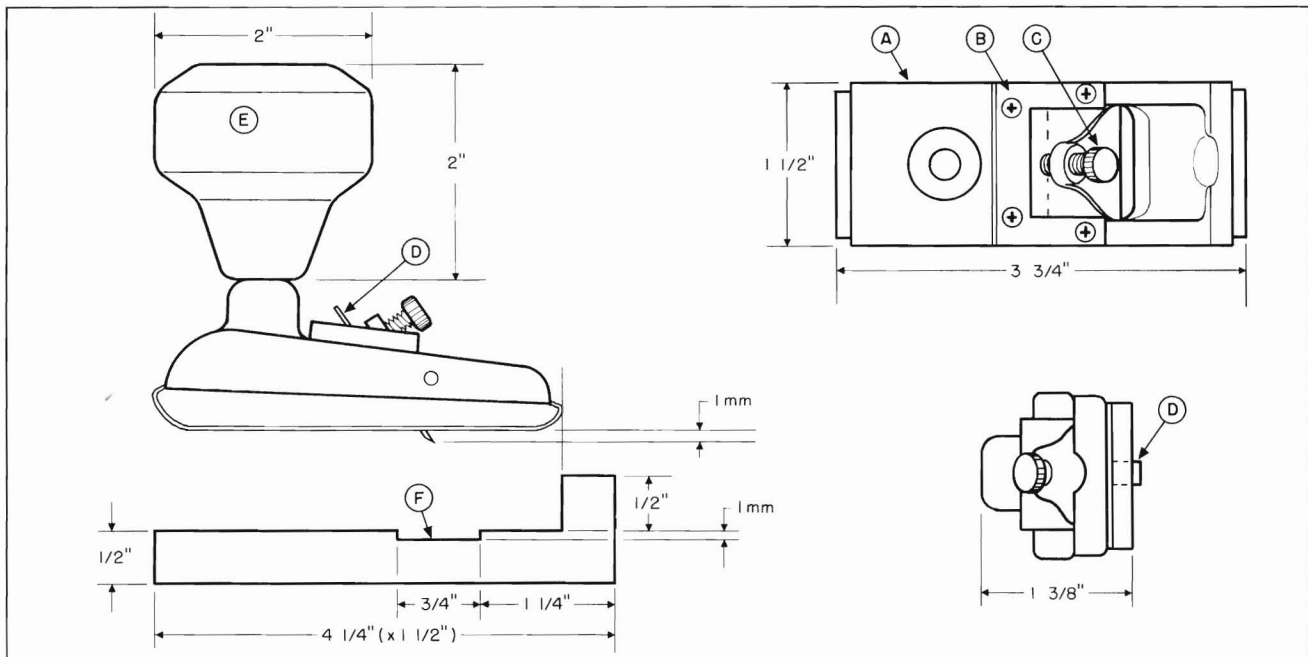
Plane gauge construction and accessories: A) Plan view of plane, B) blade guide to keep blade from canting, C) blade locking screw, D) blade ($\frac{3}{16}$ inch wide) which extends 1 mm beyond bottom, E) hand knob for pushing and guiding the plane, F) gauge block for setting blade extension exactly to 1 mm.
